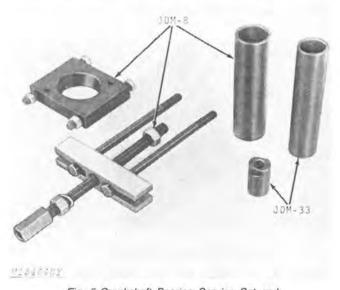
Crankshaft Bearing Service Set and Bearing Tool Adapter Kit
